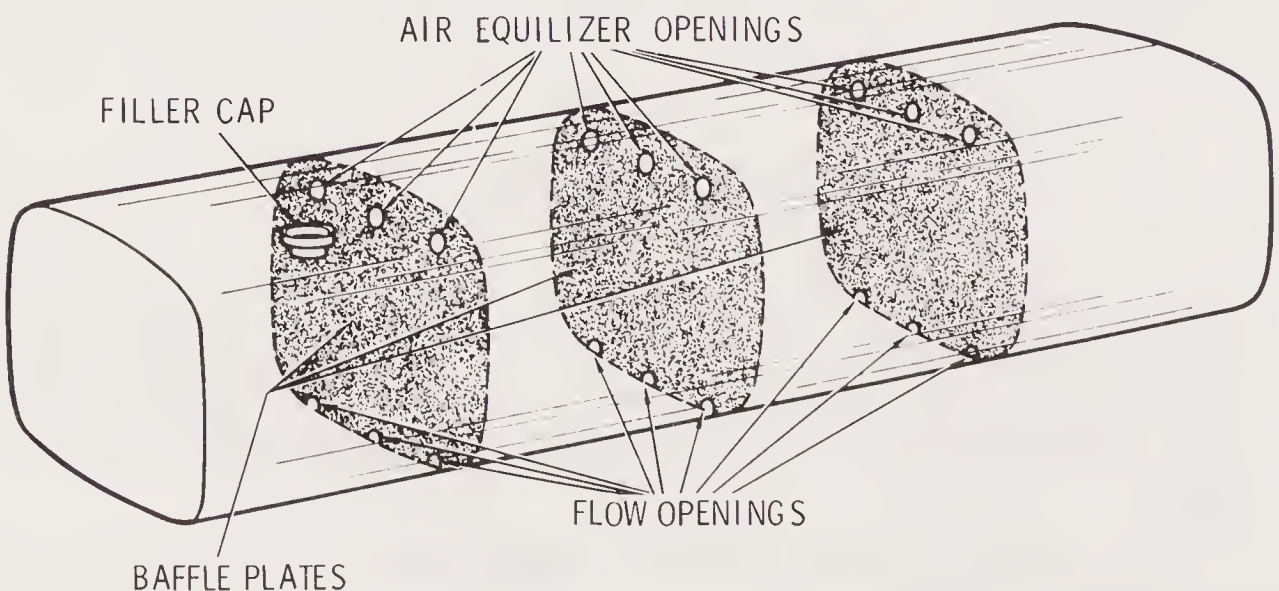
Typical baffled fuel storage tank showing filler opening.
